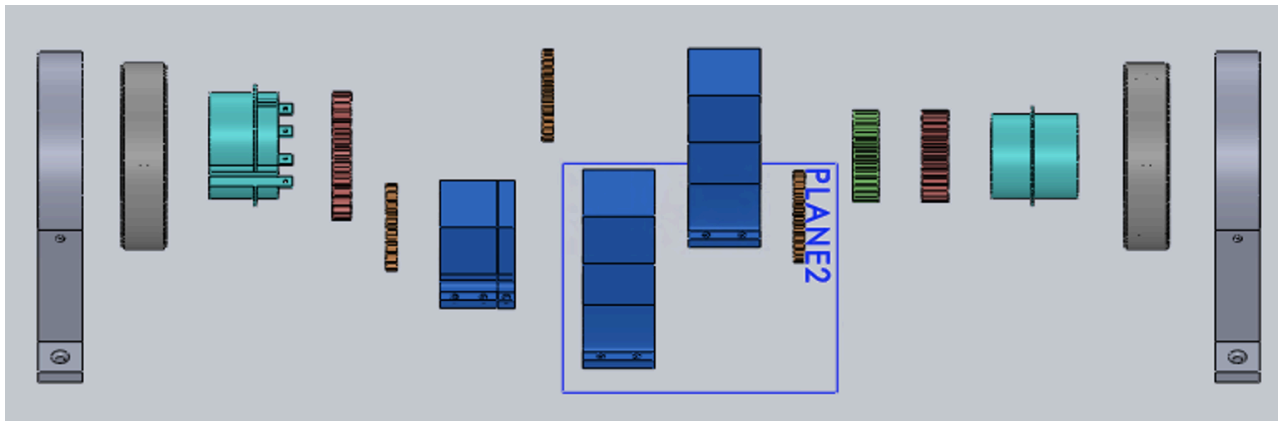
Expanded view of the Solidworks assembly of the robotic catheter system.
